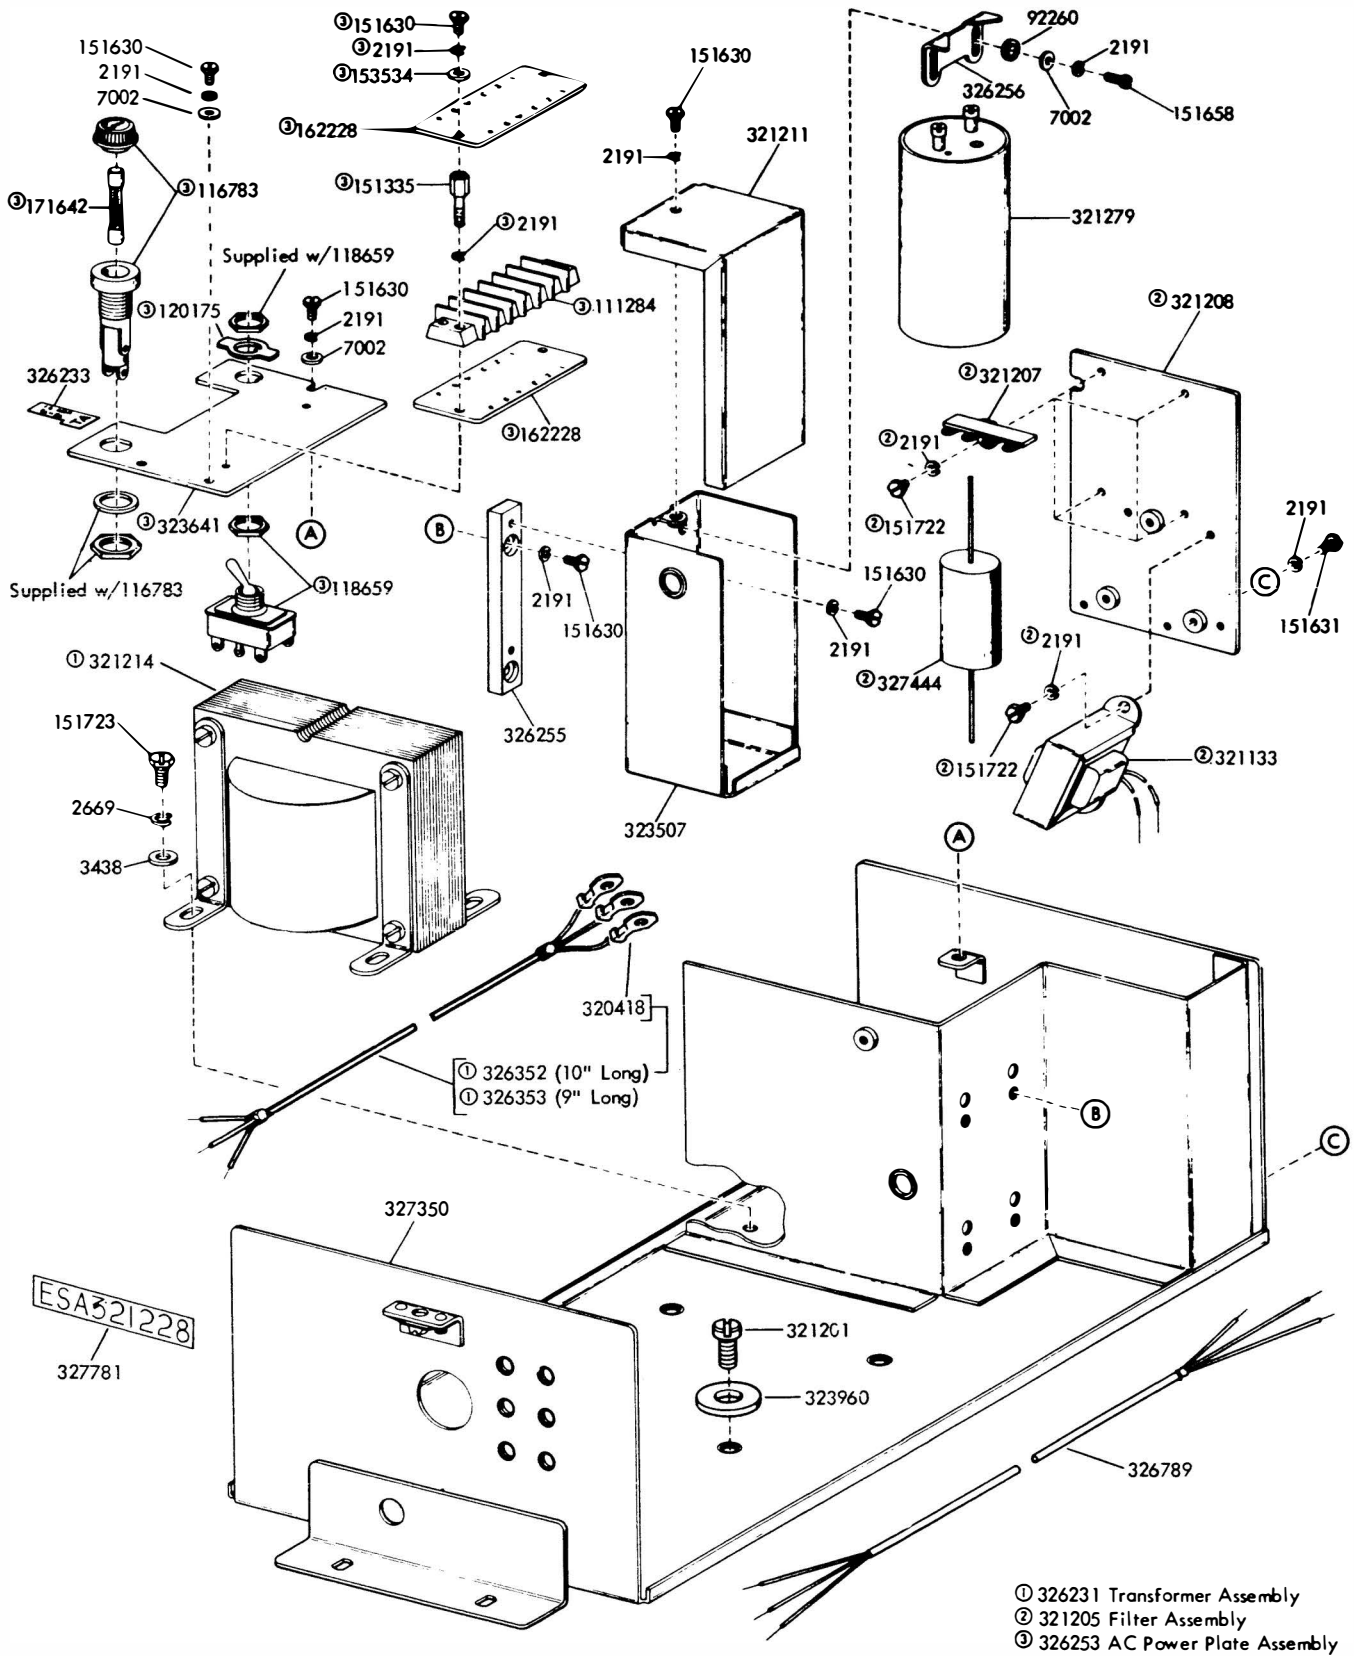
321228 ELECTRICAL SERVICE ASSEMBLY - Multiple LP Set
